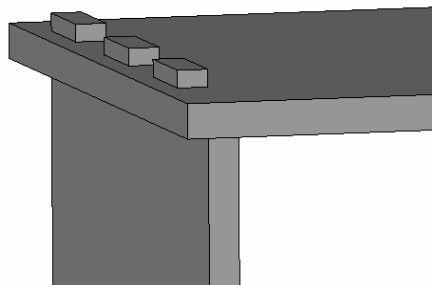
Applied joint geometry for better manufacturability, dimensioning and tolerances.
